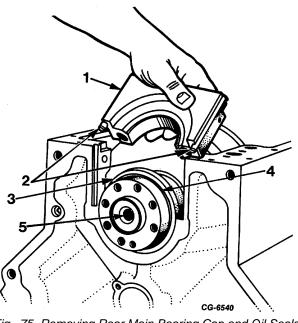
Removing Rear Main Bearing Cap and Oil Seals
